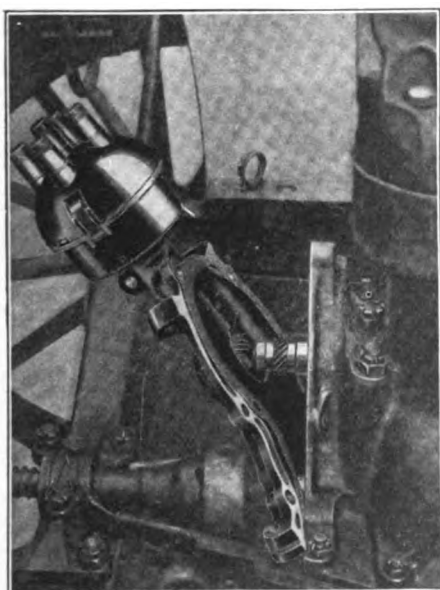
New gear cover being placed in position. Note that the fan pulley is moved forward about one-half inch
